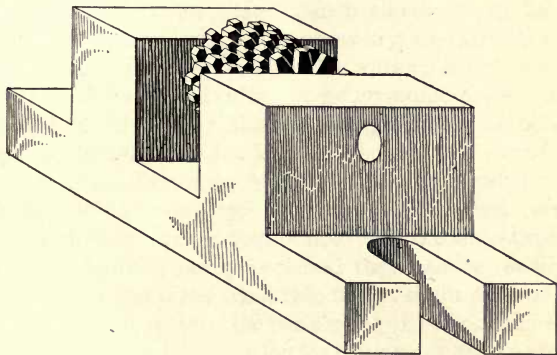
Truing device for use on large vertical spindle grinding machines.
